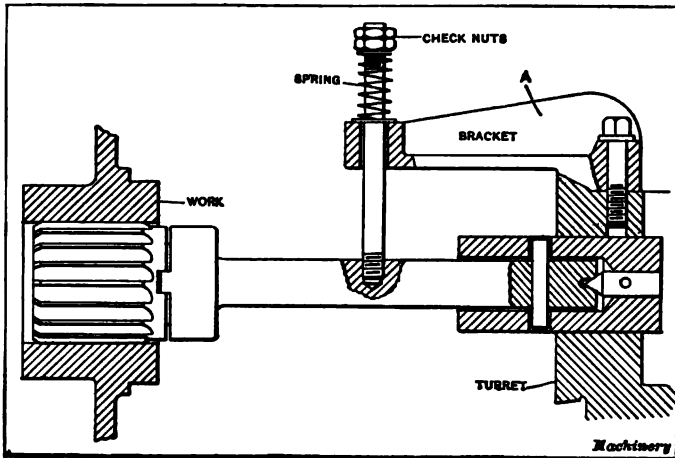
Method of Balancing Reamer Holder with Spring and Bracket from the Turret
